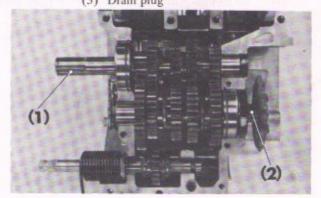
(1) Mainshaft assembly (2) Countershaft assembly
